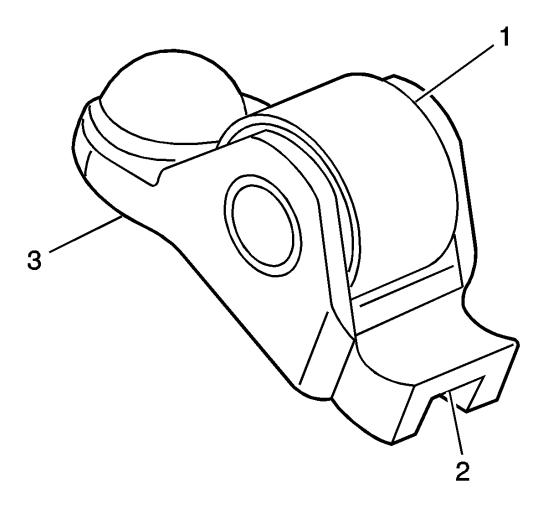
Valve Rocker Arm Inspection Areas Courtesy of GENERAL MOTORS COMPANY
